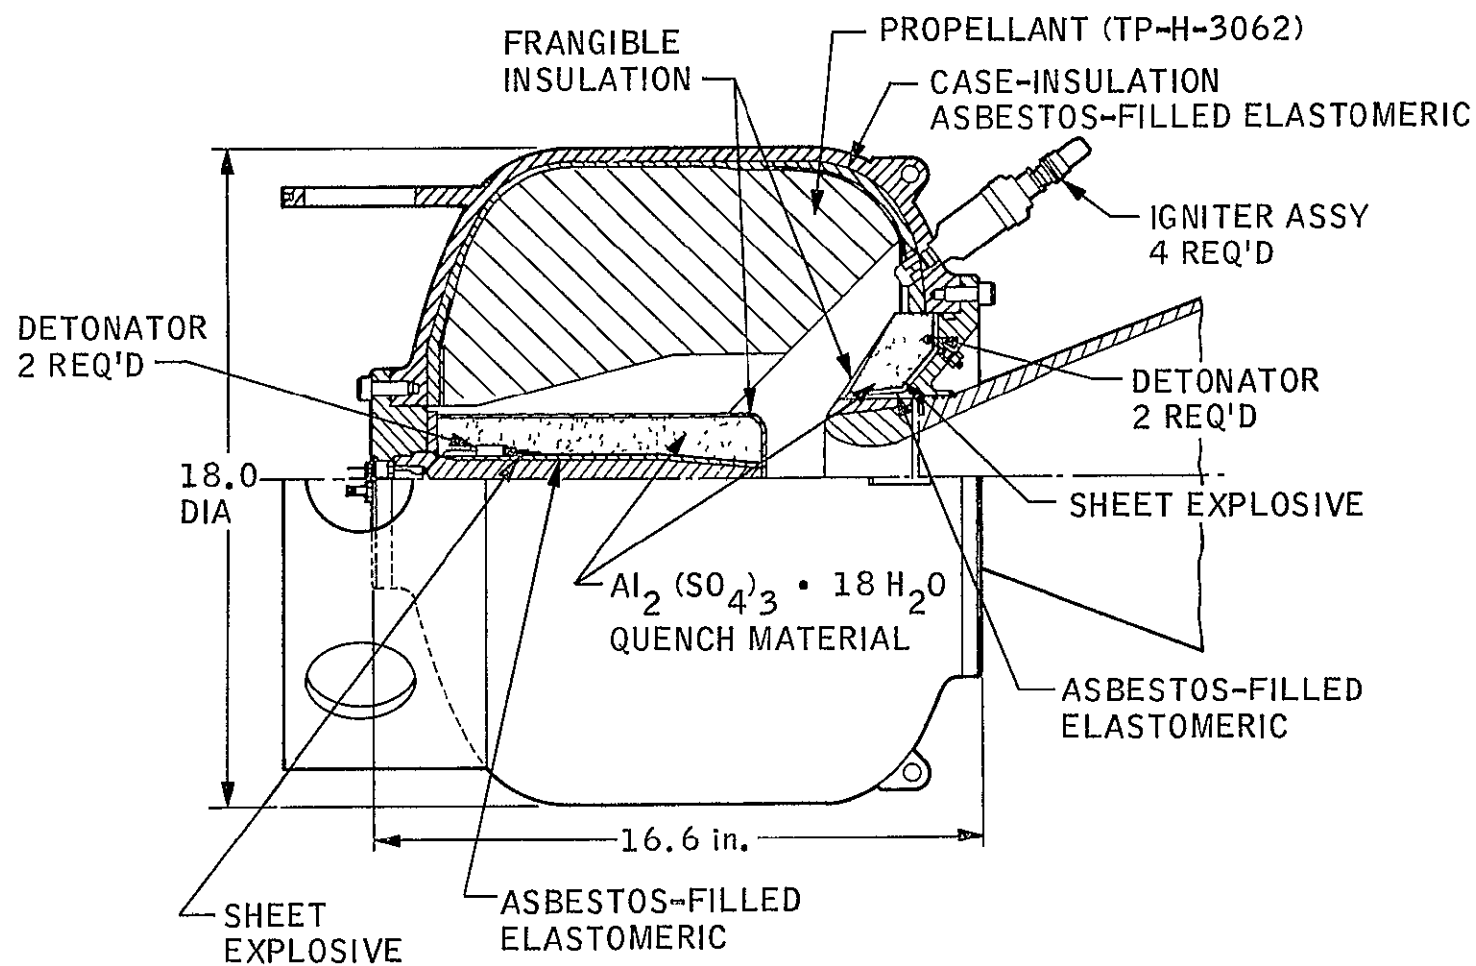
18-INCH-DIAMETER TEST MOTOR
